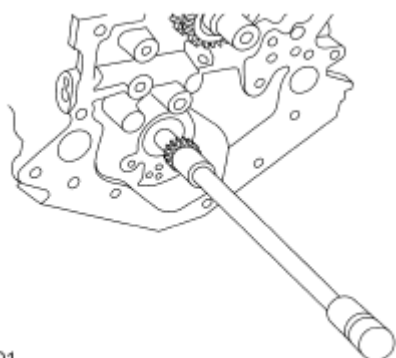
Locating Jackshaft Thrust Plate Bolts
